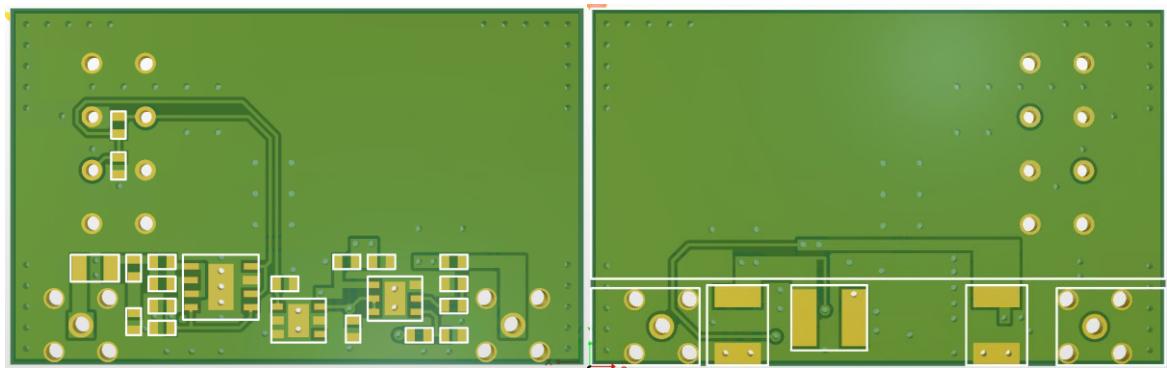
2D rendering of the gate driver (L) Top View (R) Bottom View
